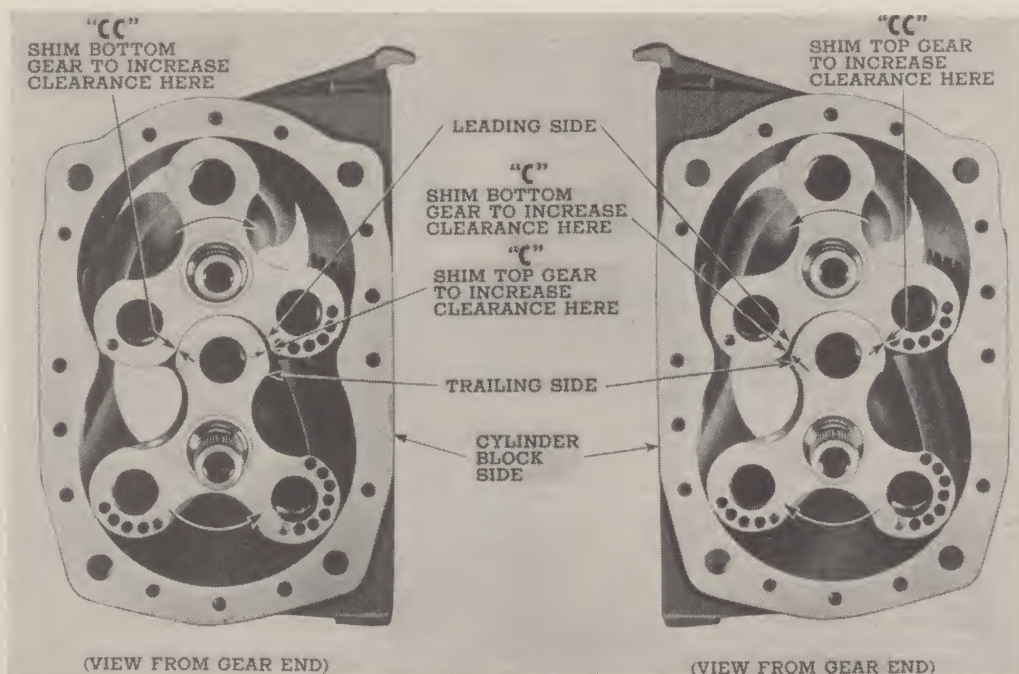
D—Showing proper location of shims to obtain correct rotor lobe clearances "C" and "CC".
